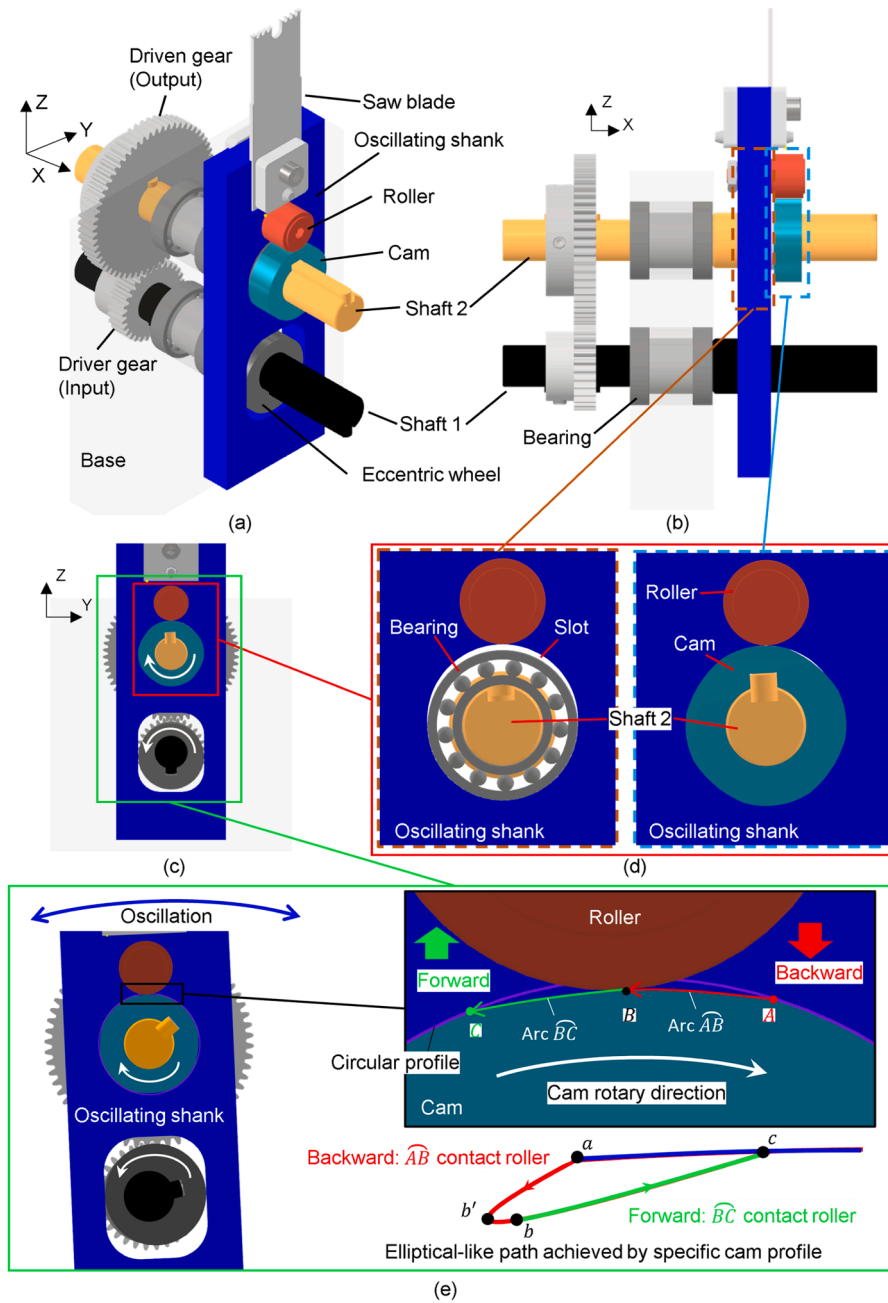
Proposed oscillating saw mechanism: (a) Isometric view. (b) Side view. (c) Front view. Detail views of (d) cam and roller, and (e) oscillating shank and eccentric wheel. Shaft 1, driven by the motor, drives Shaft 2 via a gear pair (Gear 1 and Gear 2). The eccentric wheel fixed on Shaft 1 drives the oscillating shank and blade, causing them to oscillate around Shaft 2. The cam is fixed on Shaft 2, and the roller, fixed on the oscillating shank, makes contact with the cam profile. A slot, as shown in detail view (d), on the oscillating shank allows Shaft 2 to move up and down, achieved by the roller-cam contact. Backward motion occurs when the cam rotates into the depression relative to the circular profile (Arc \widehat{AB}), and forward motion occurs when the cam rotates out of the depression relative to the circular profile (Arc \widehat{BC}). The elliptical-like path results from the combined oscillation and backward-forward motion. All the shafts are supported by bearings and base. A detailed animation of this simulation is available in the [supplementary material 1](#).
